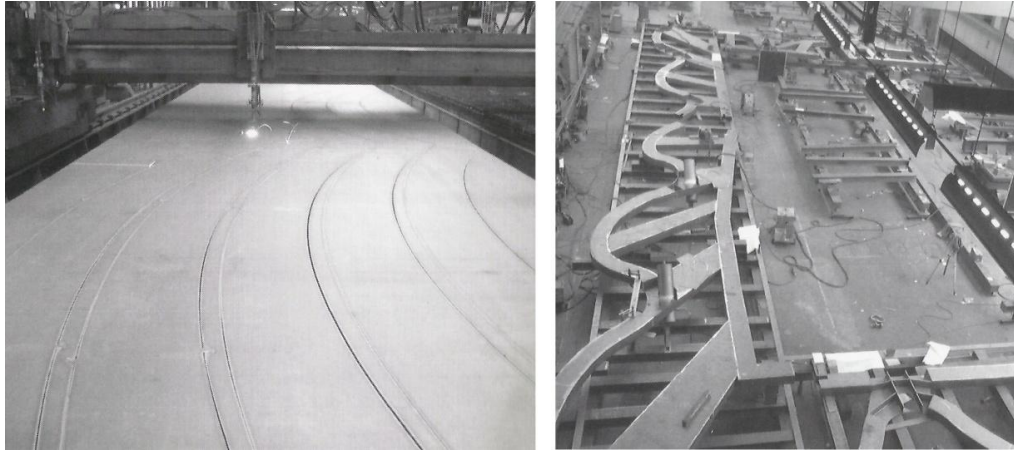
22. CNC plasma cutting of structural pieces and manual welding operation
